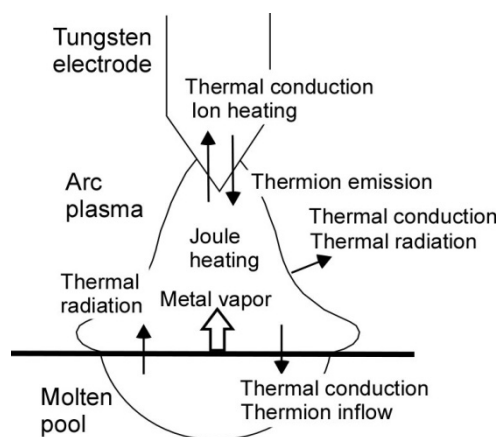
Schematic illustration of heat transfer in GTA welding
